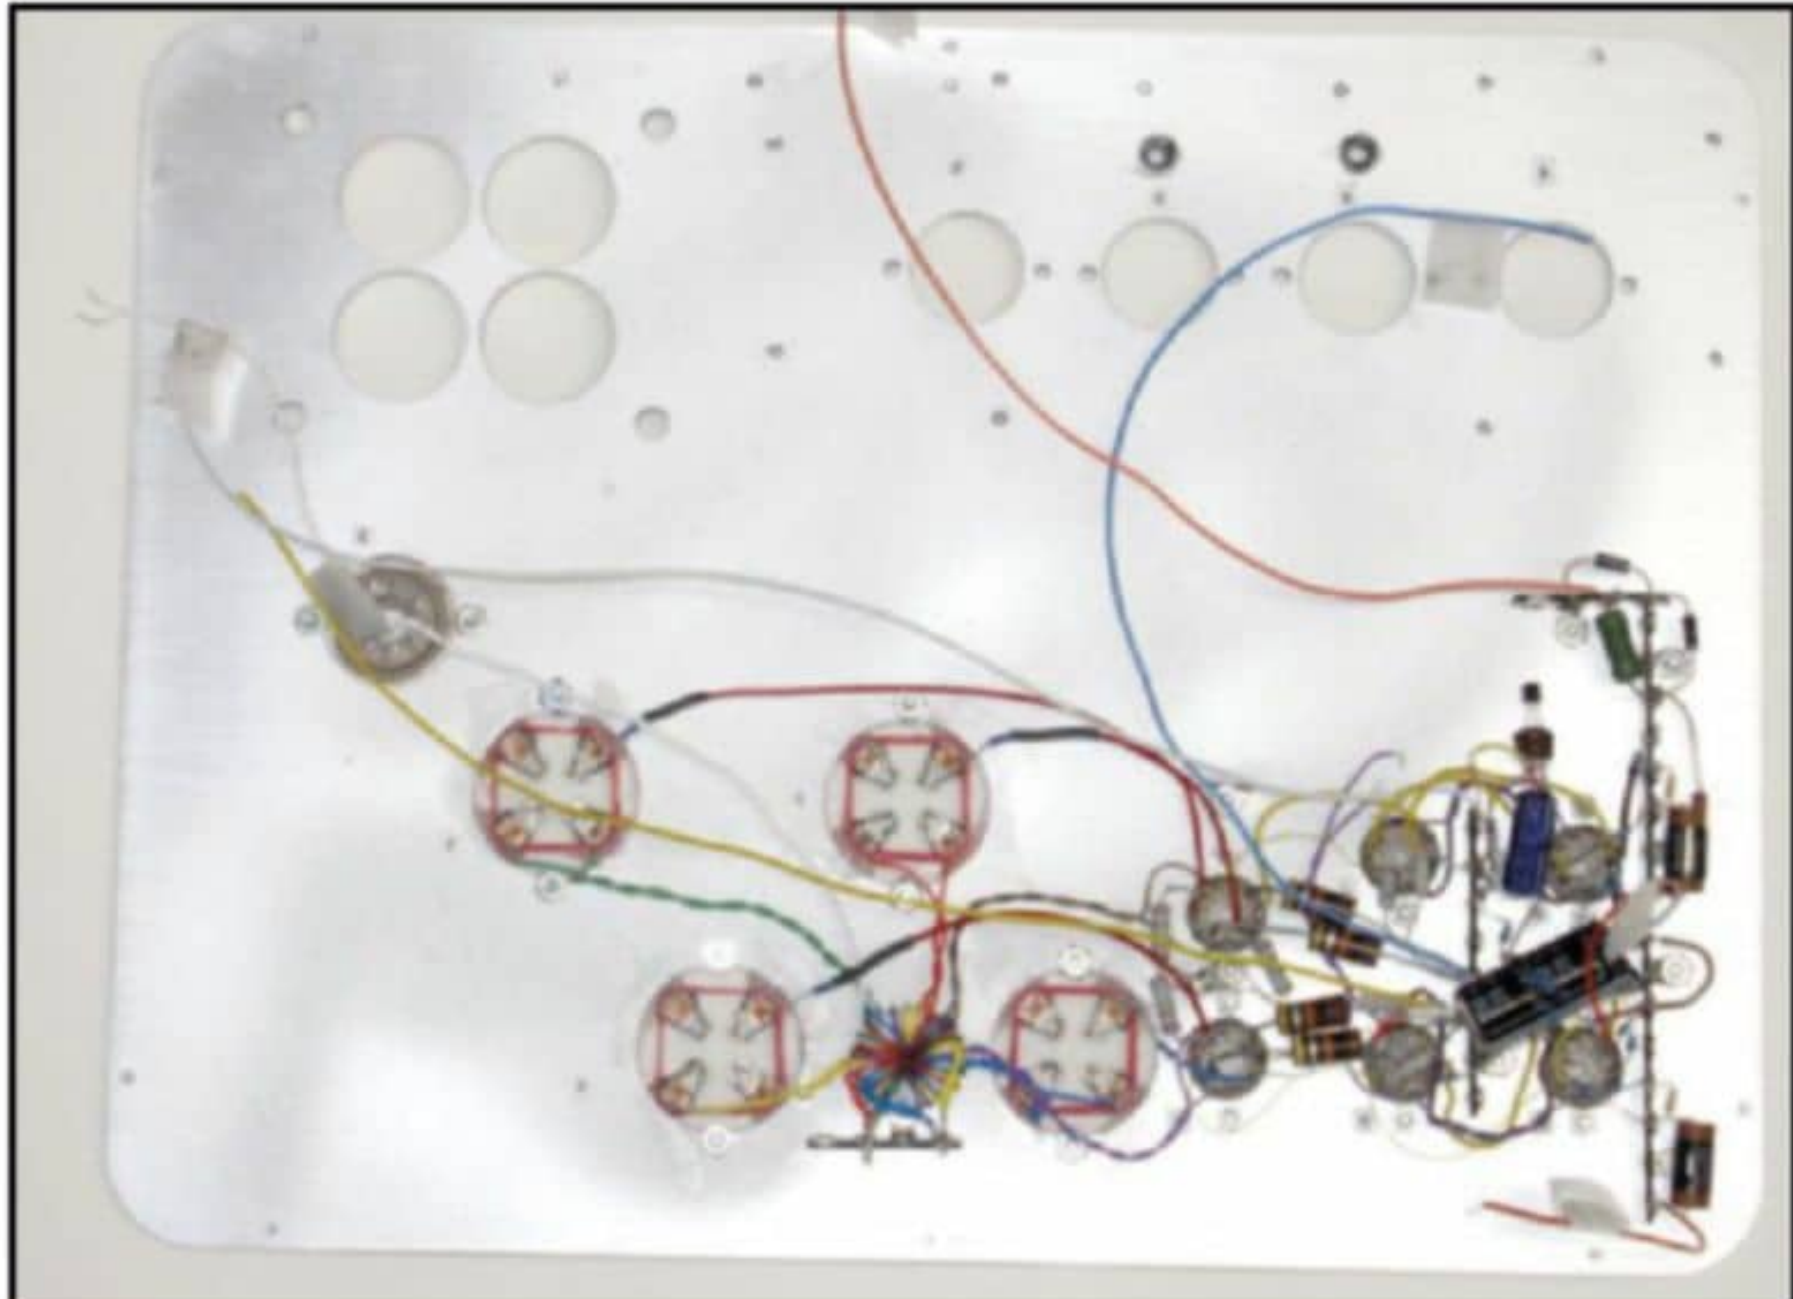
The bottom of chassis is shown with a partial wiring of sockets.
